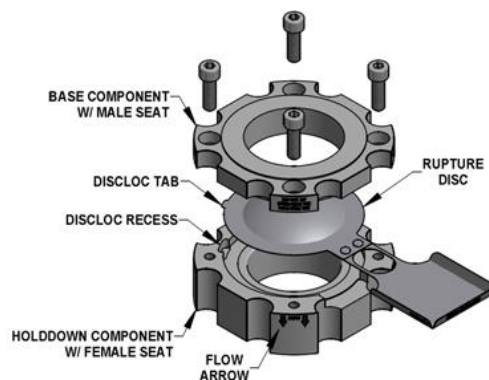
Fike Reverse Acting Bursting Disc Assembly [34, p. 2]
